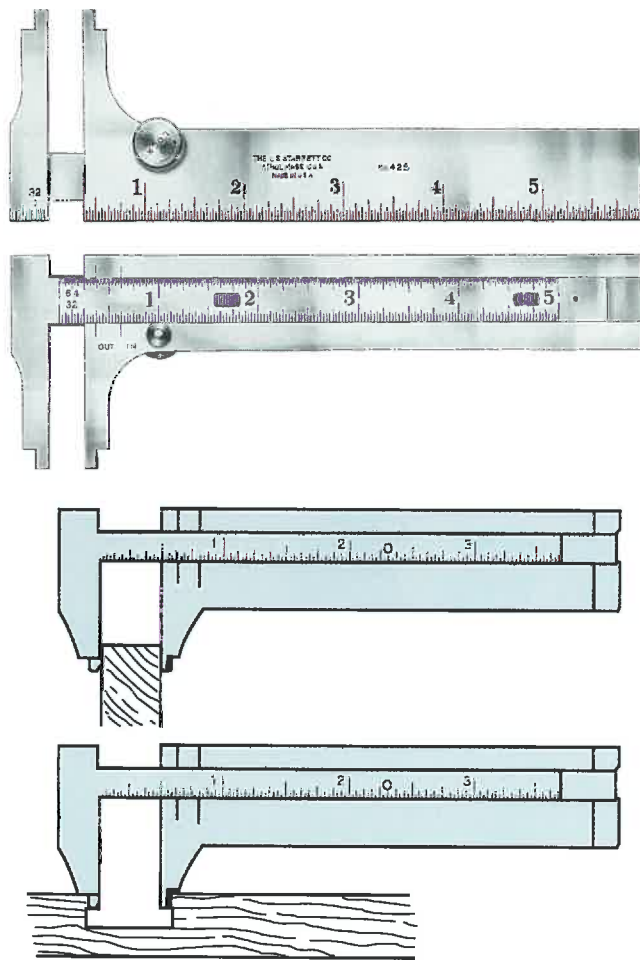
Caliper rules have a head formed to measure outside and inside dimensions. (The L.S. Starrett Co.)
